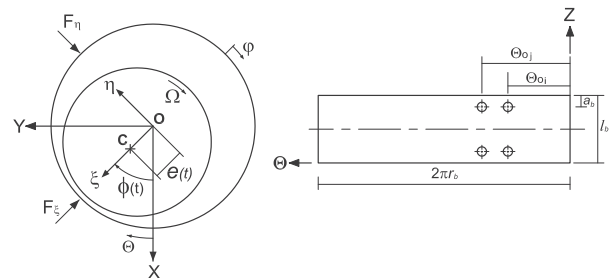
Journal bearing geometry. Left: front view; right: side view—unwrapped bearing.
